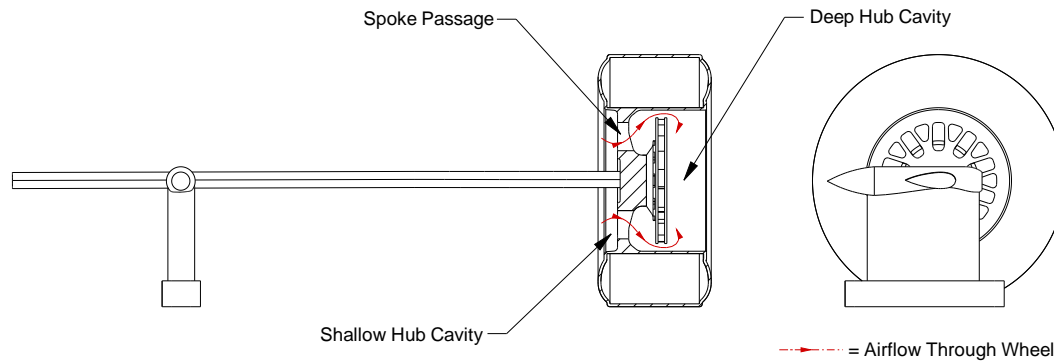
Champ Car Wheel Assembly & Support Sting
